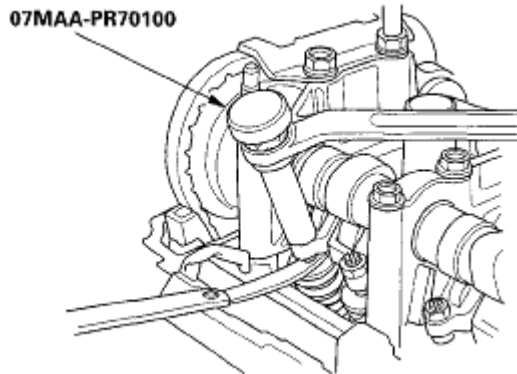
Inserting Feeler Gauge Between Adjusting Screw
